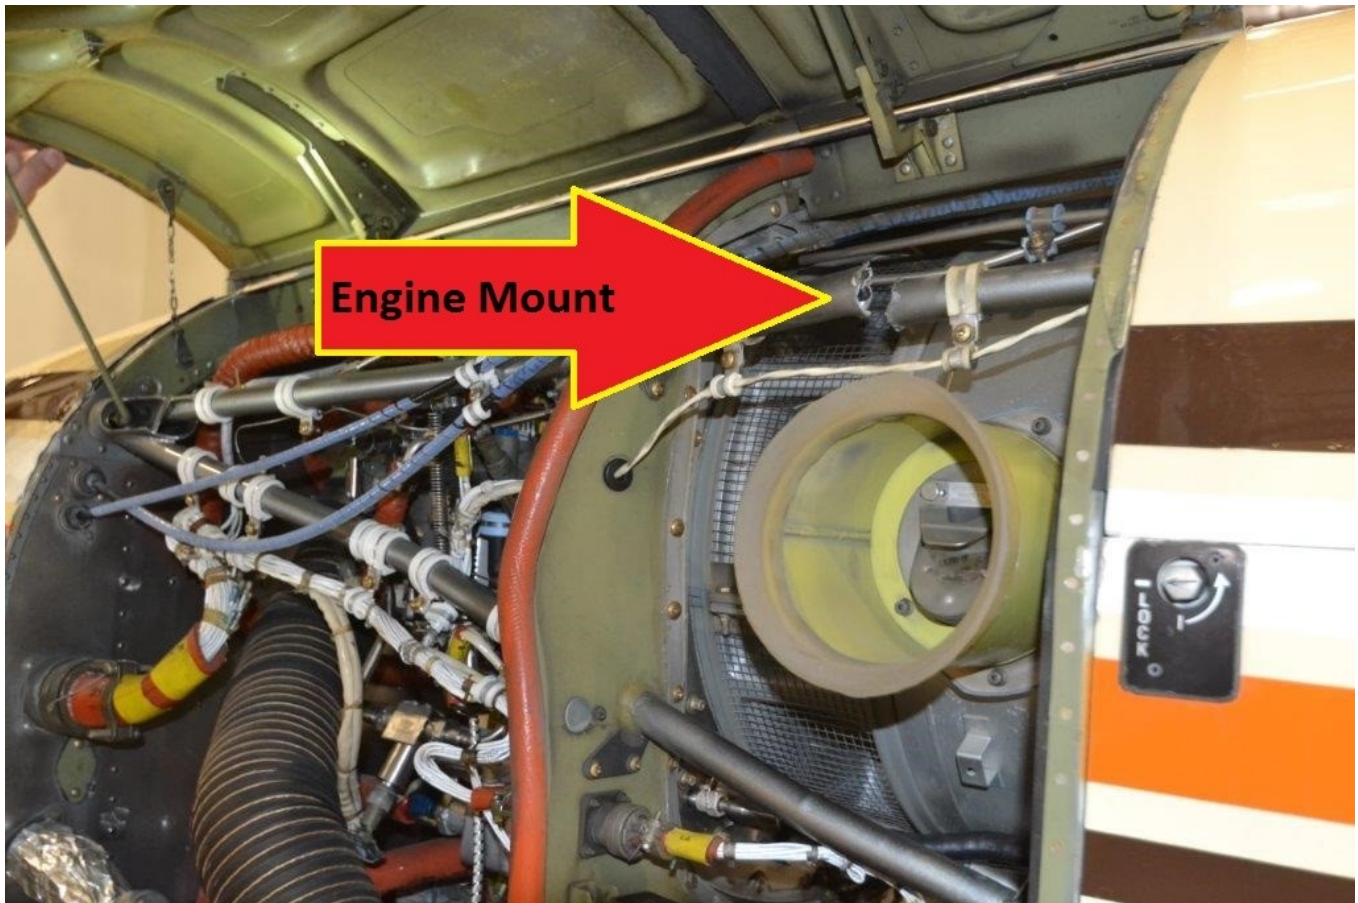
View of the fractured right engine mount (courtesy of Bering Air).
